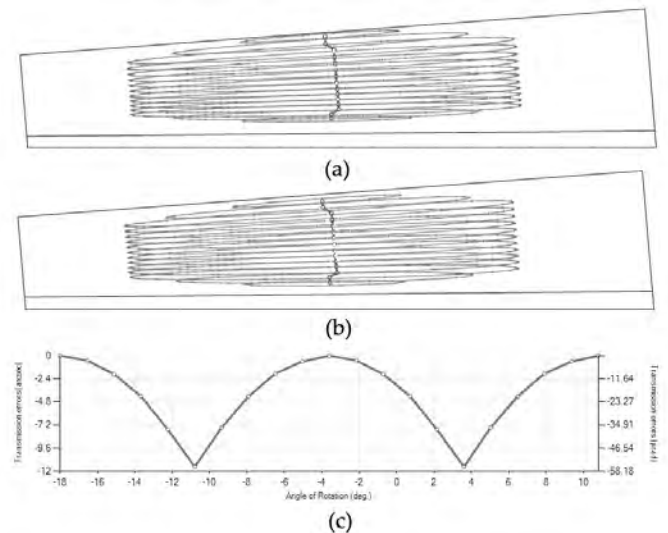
Contact pattern on (a) the pinion tooth surface, (b) wheel tooth surface, and (c) function of transmission errors for modified geometry of spherical involute gears under aligned conditions
